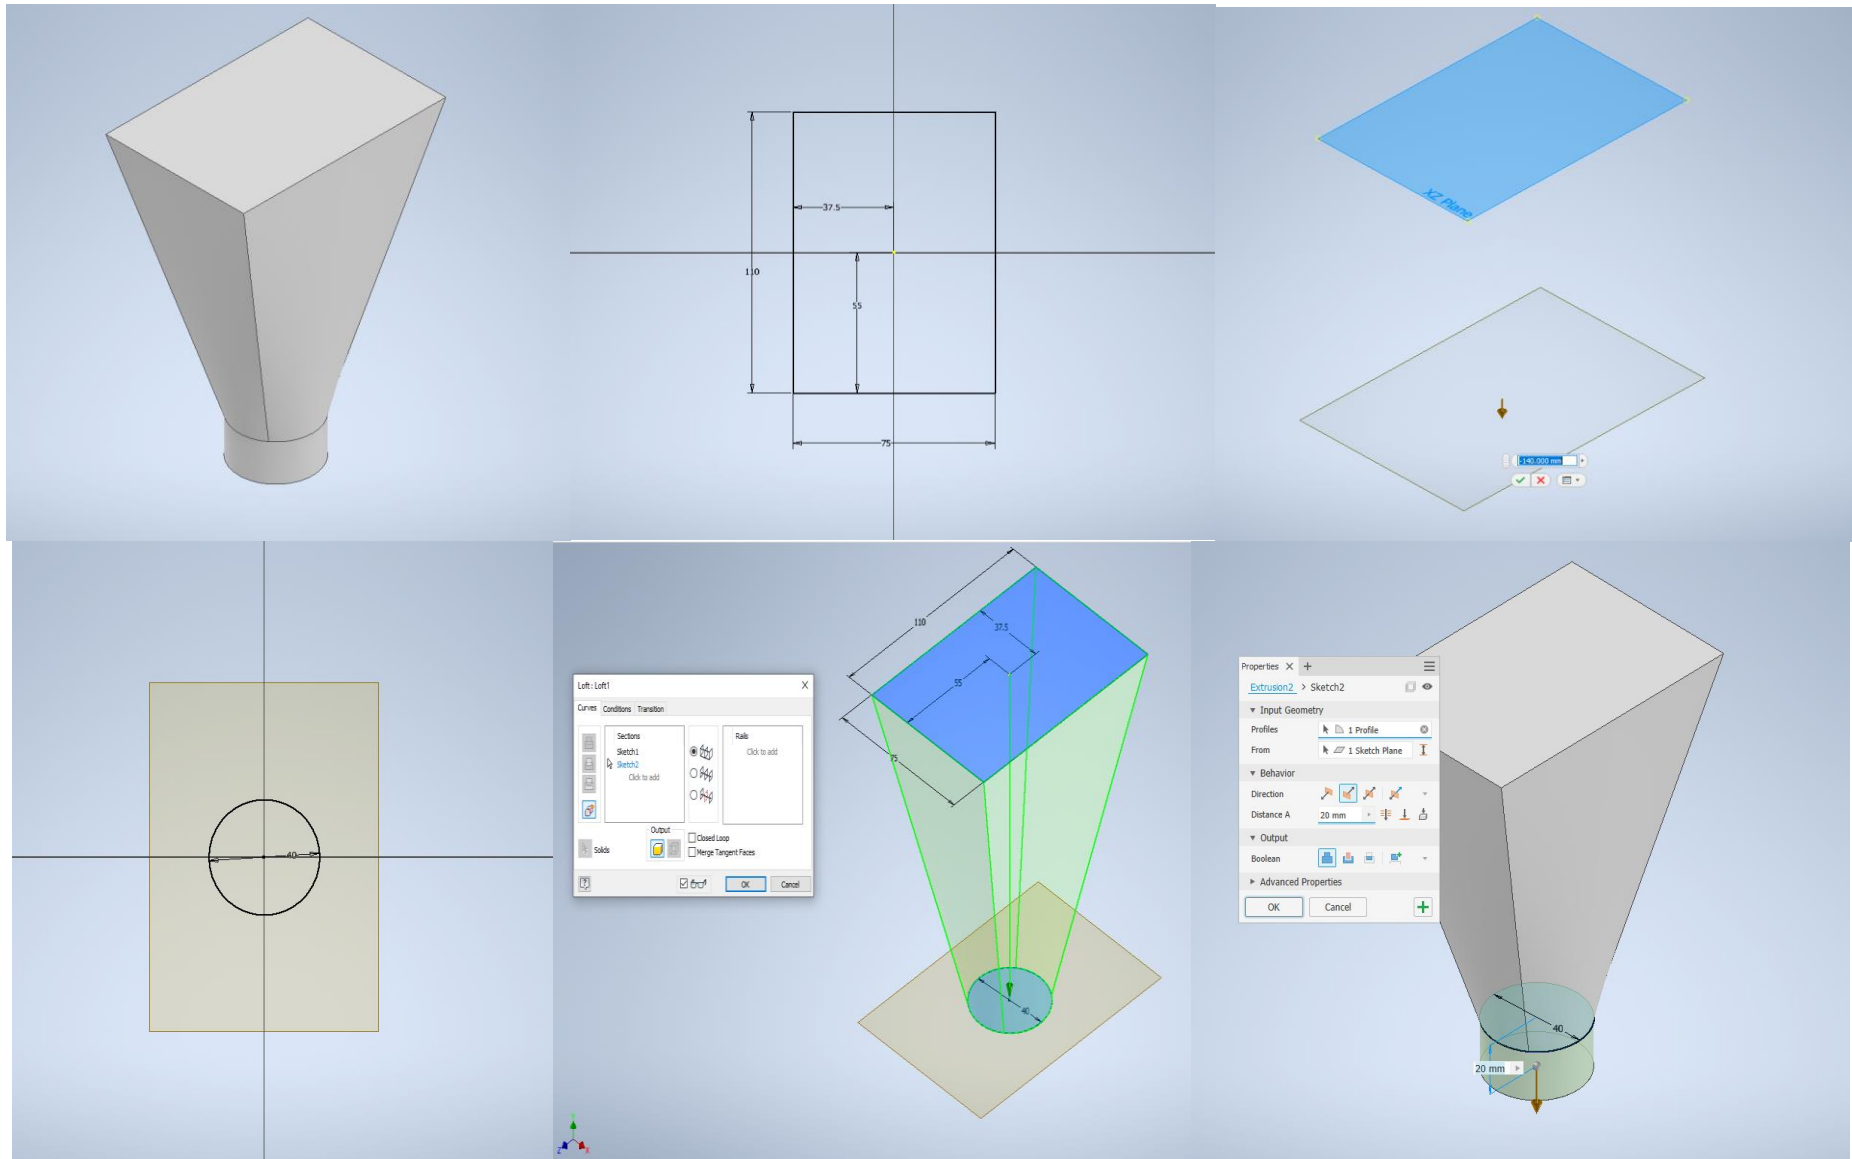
Designing chute section of the collecting bins section for Chamber 1 using the “Loft” and “Extrude” tools.
